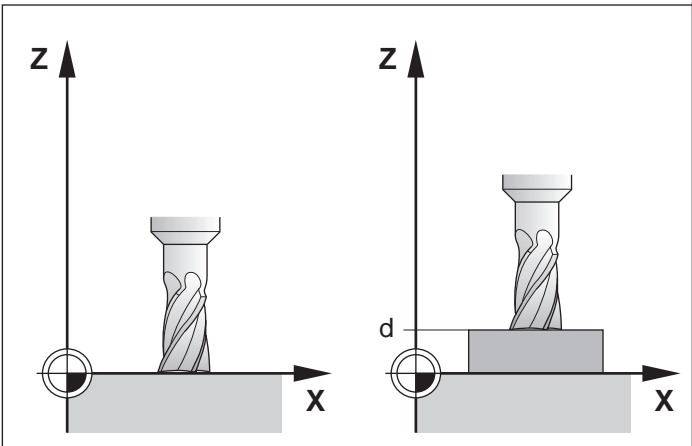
Datum setting in the tool axis; right with protective shim
